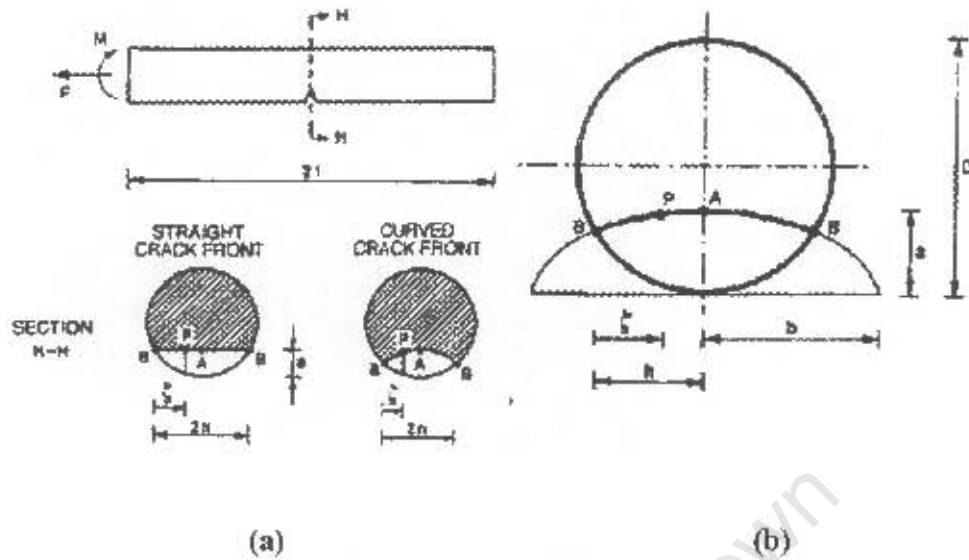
(a) Cylindrical shaped structural component with straight front crack and curved fronted cracks.
